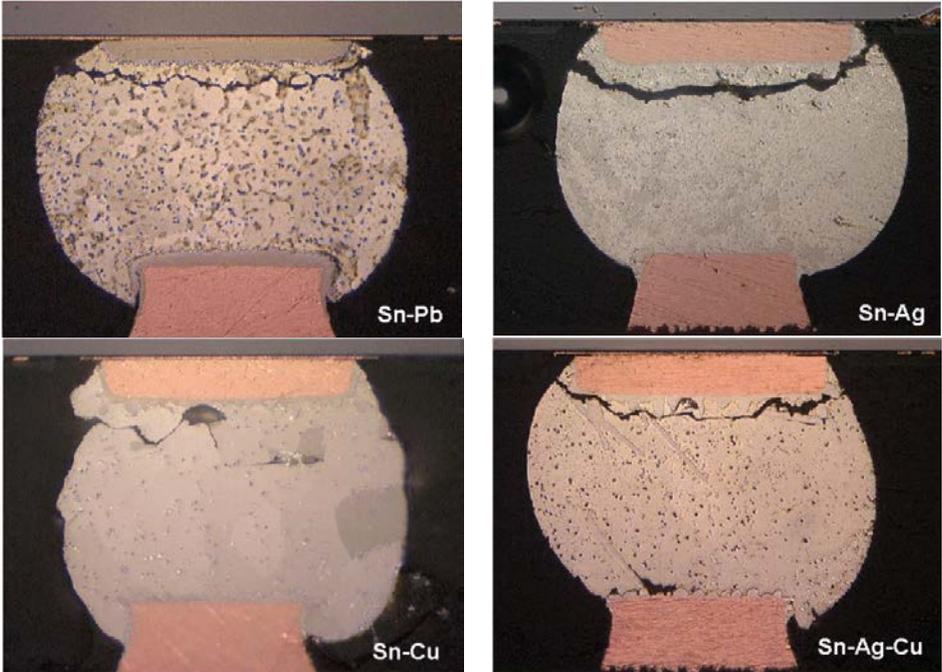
Several solder ball crack examples. From [Frear-01]
